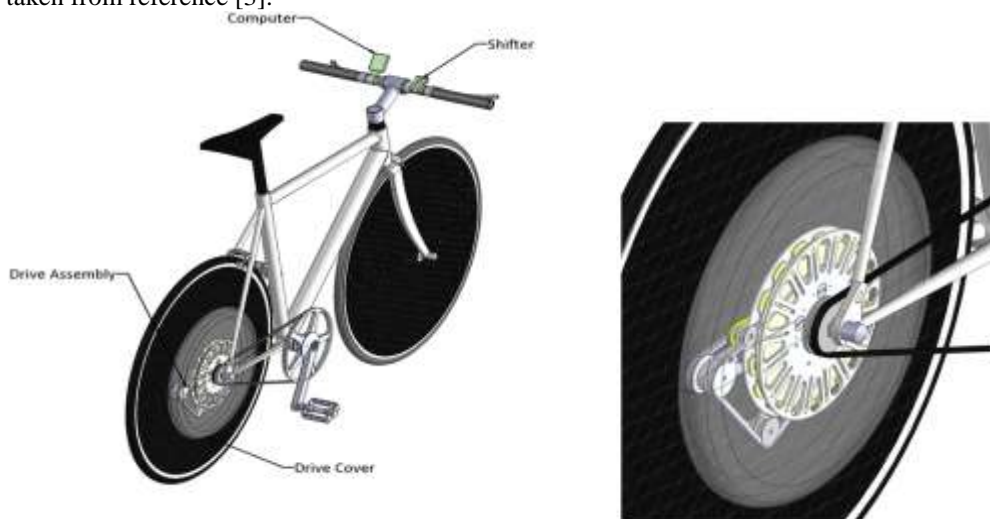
eDrive assembly on bicycle in operation with a close-up of the assembly (right).[3]
